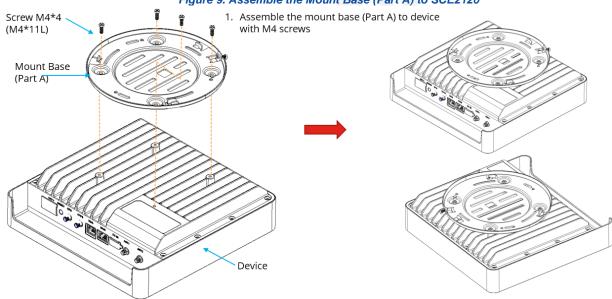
Assemble the Mount Base (Part A) to SCE2120
